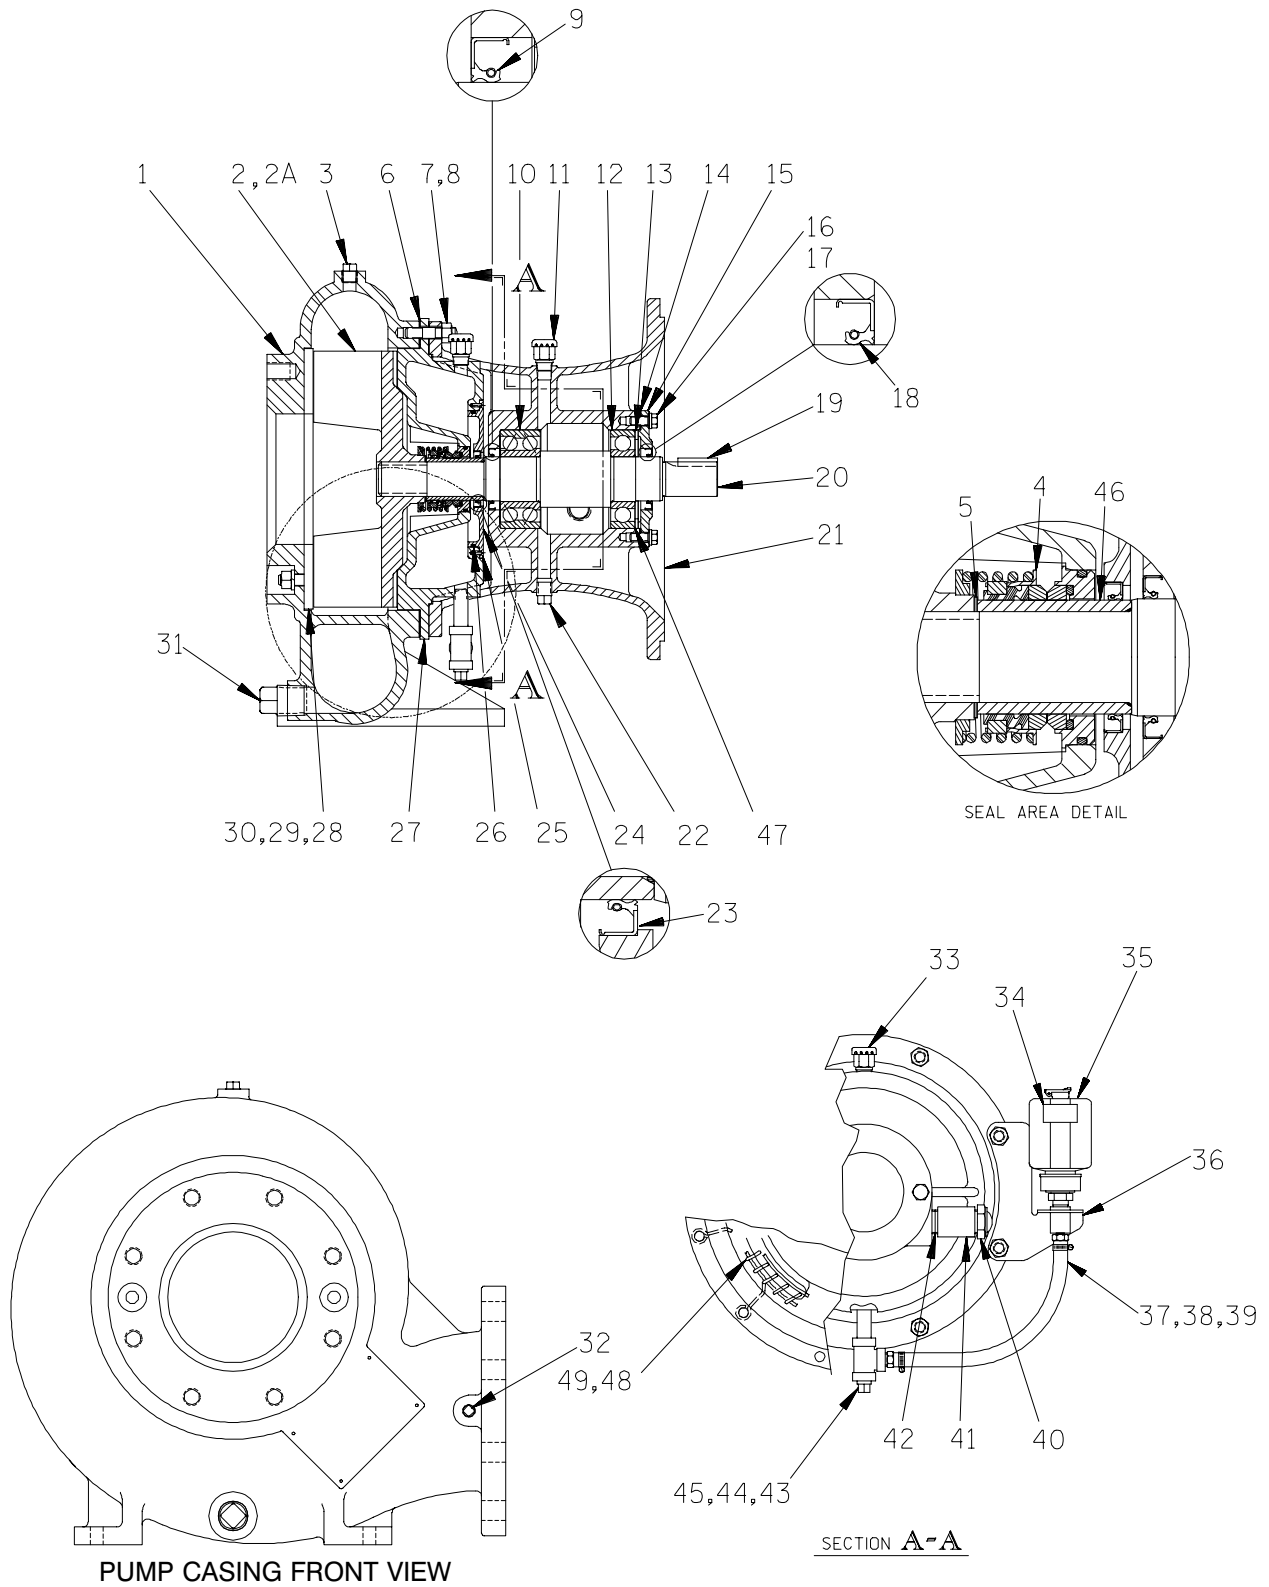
66E60-(SAE4/10) Pump Assembly
